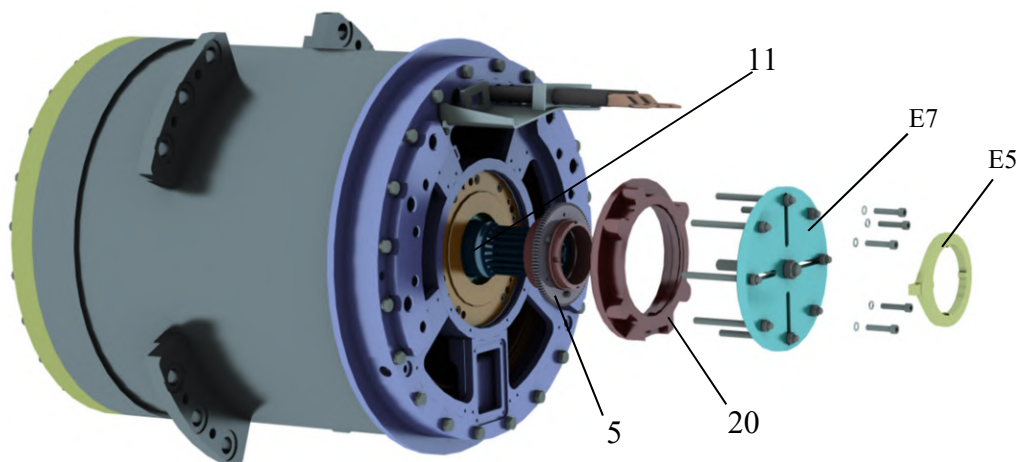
Dismantling of Rotation Speed Sensor Mounting Cover and Serrated Lockwasher
